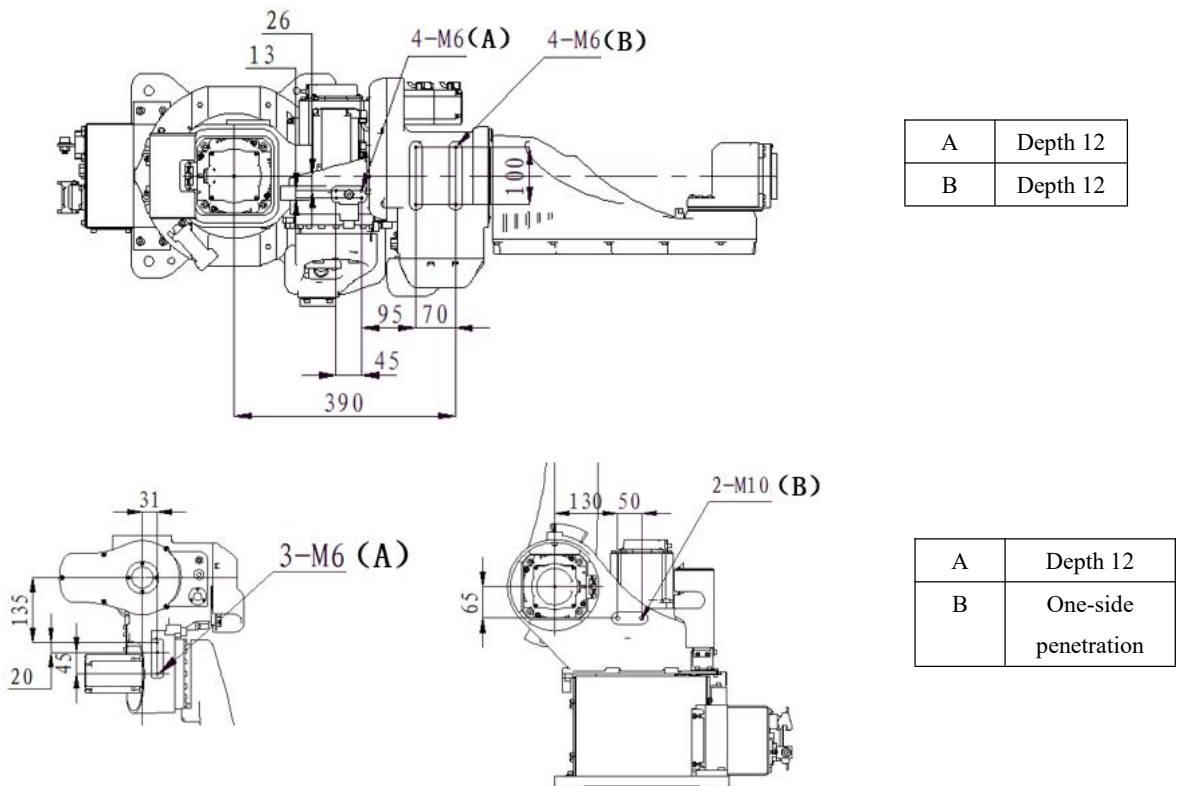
SA6/1440H forearm drive box and swivel seat auxiliary installation hole dimensions
